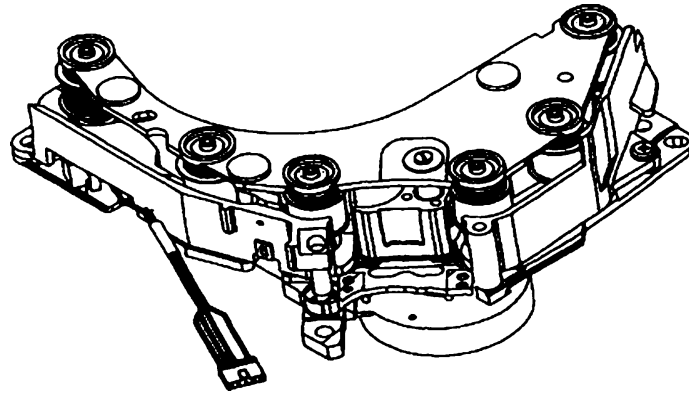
Linear (DLT) head guide and tape handling assembly. Note the six guiding rollers that control tape position.
